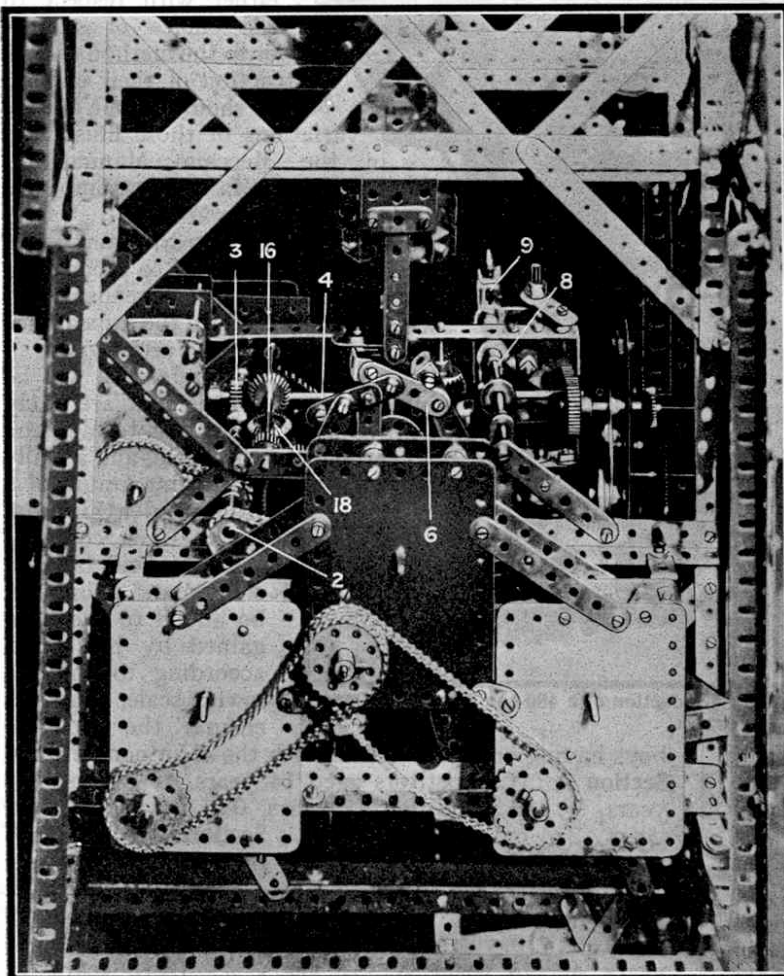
The mechanism from the "9 o'clock side," showing the driving spindles of the three side Motors linked together by Sprocket gear.
